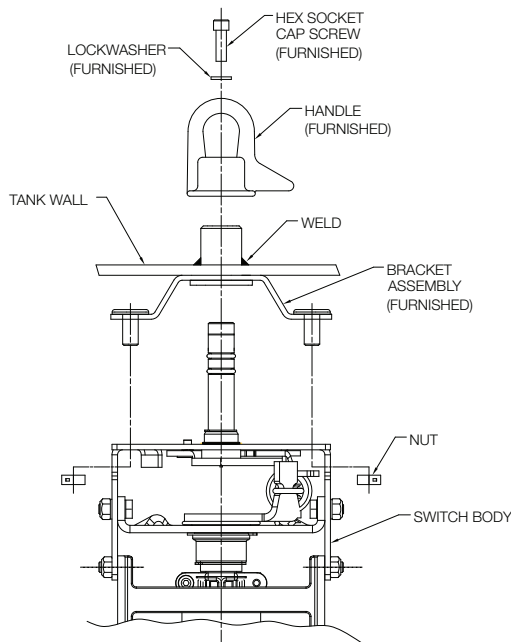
2-position weld-in mount offset loadbreak switch.
